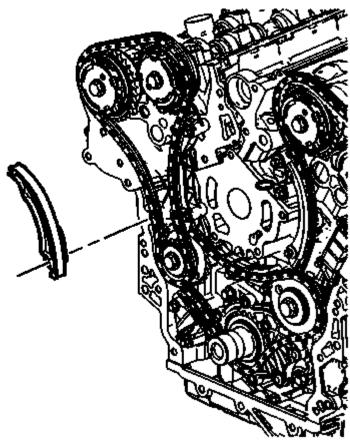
View Of Right Secondary Camshaft Drive Chain Shoe Courtesy of GENERAL MOTORS COMPANY
